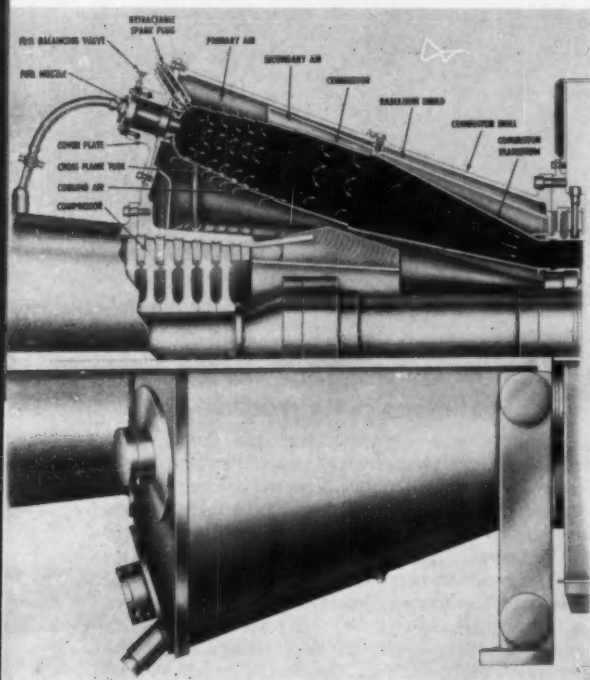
The combustor system utilizes six combustors which are conically arranged between the compressor outlet and the turbine inlet
